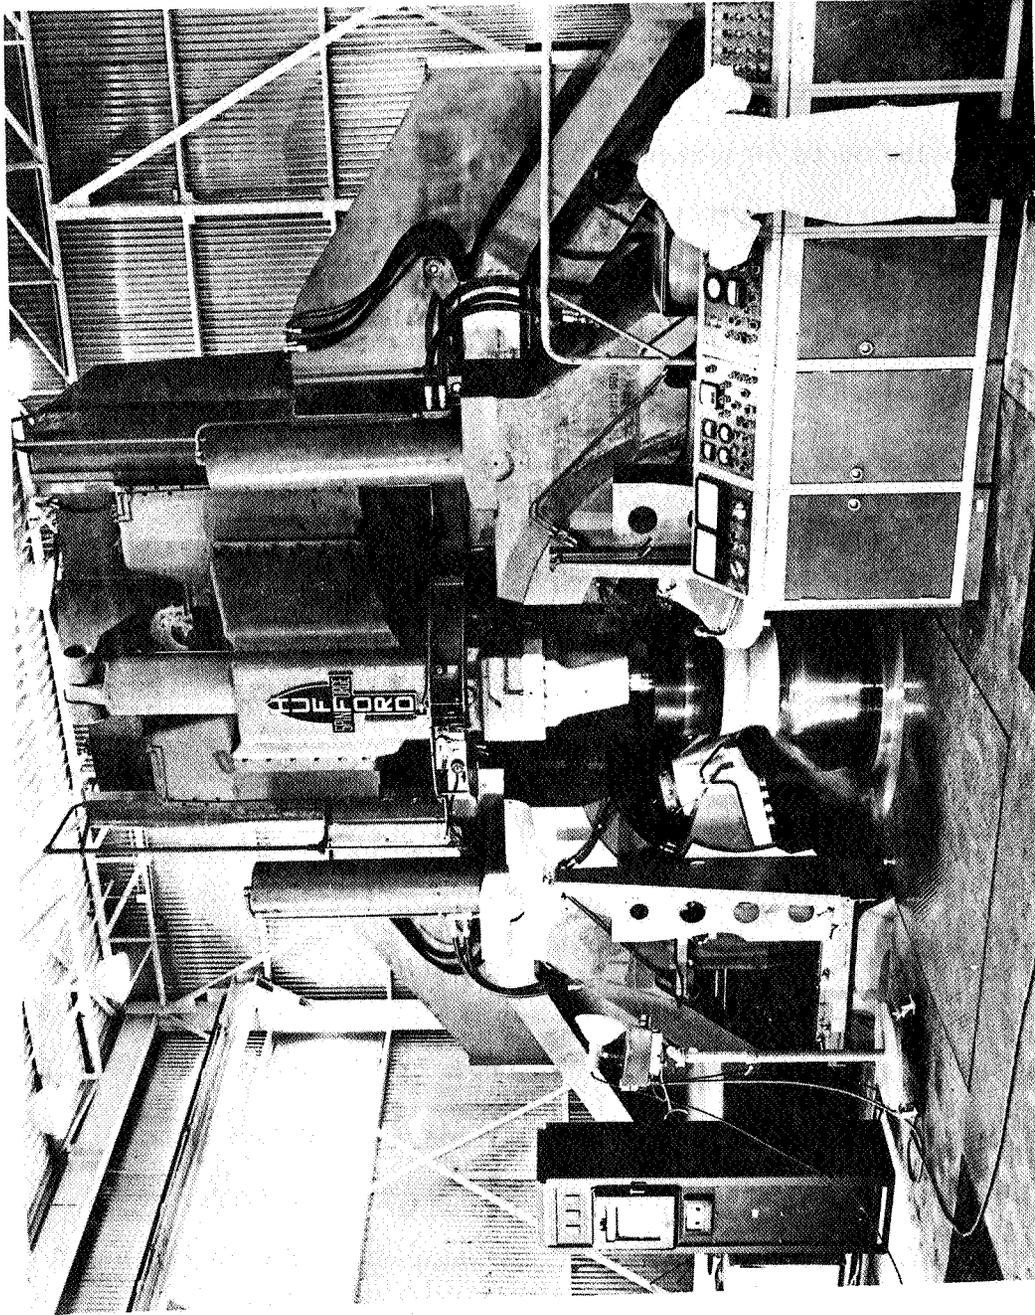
60-INCH SHEAR-FORMING MACHINE FORMING A TYPE 321 STAINLESS
